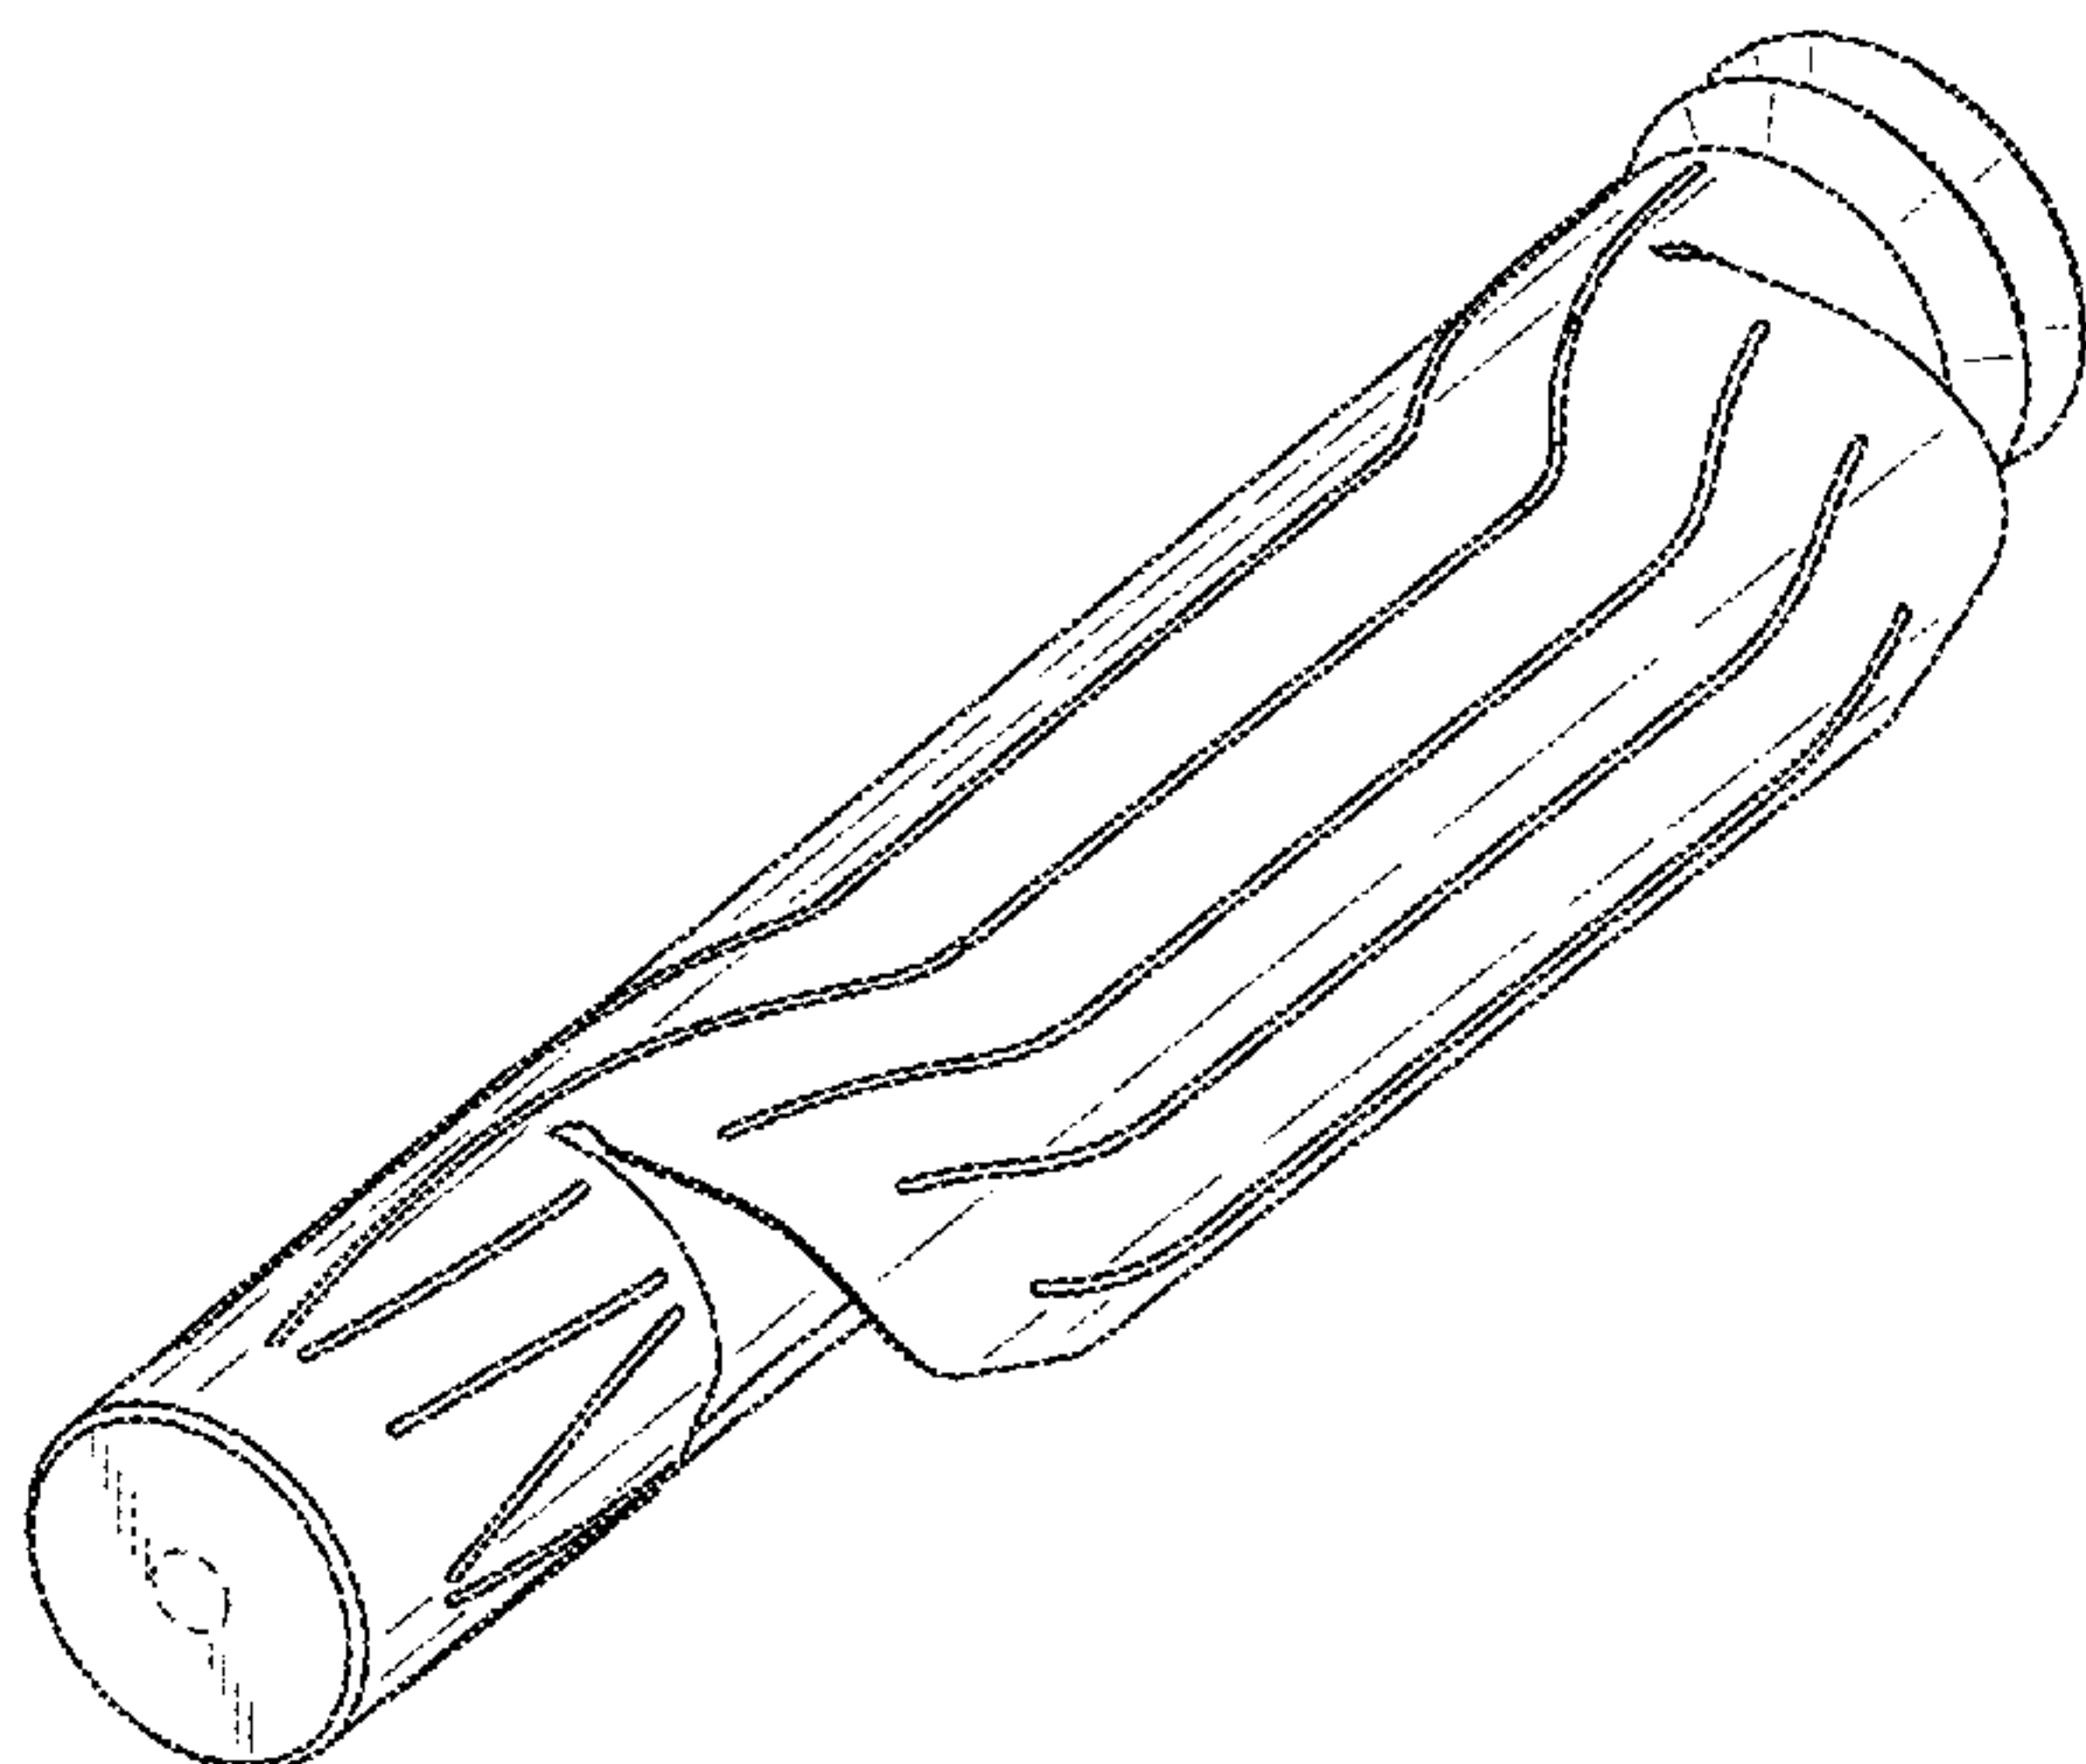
is a front and left-side top perspective view of the tool sleeve with the flap of the tool sleeve in a closed position;
